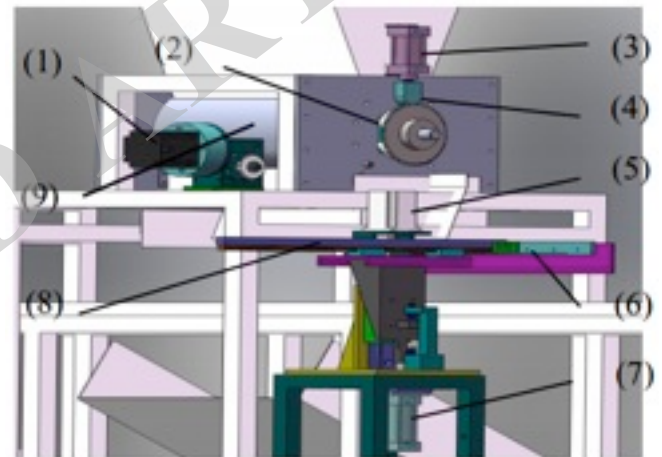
Feeding system. Legend: (1) RECLAIMER MOTER (2) CONTROL PANEL (3) VIBRATION CYLINDER (4) WEDGR (5) SCRAPER MOTOR (6) STRICKING PLATE (7) LIFTING CYLINDER (8) STRICKING ROD (9) THE BLADE SHAFT.
